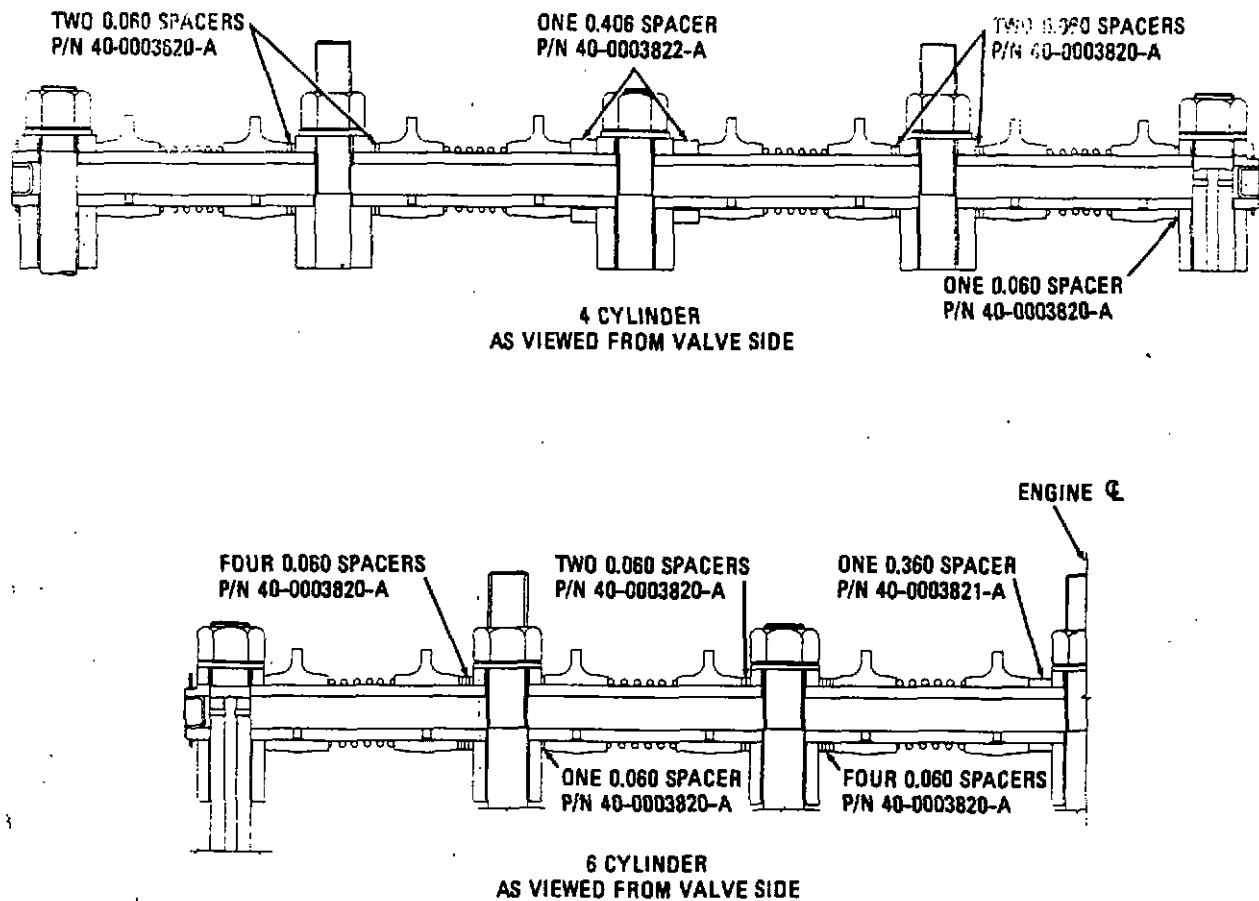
Rocker Arm Shaft Showing Spacer Positions for Engines Having Identically Sized Shaft Supports
